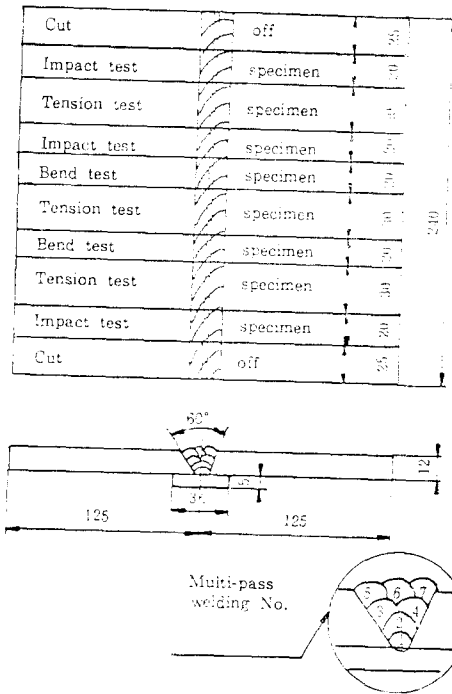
Joint design and location of mechanical test specimens from in-air welds and underwater welded joints
